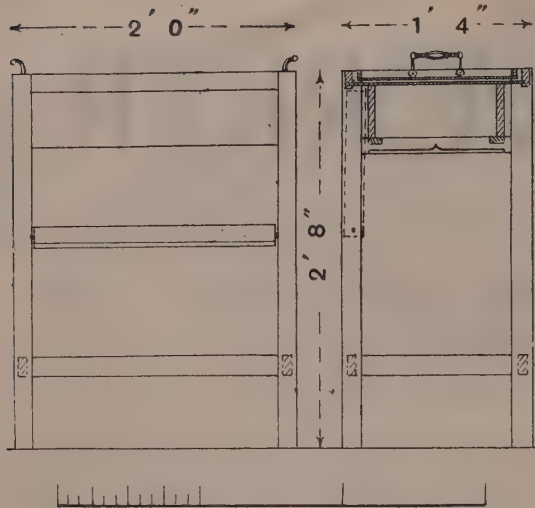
FRONT ELEVATION. FIG. 3.—END VIEW.
